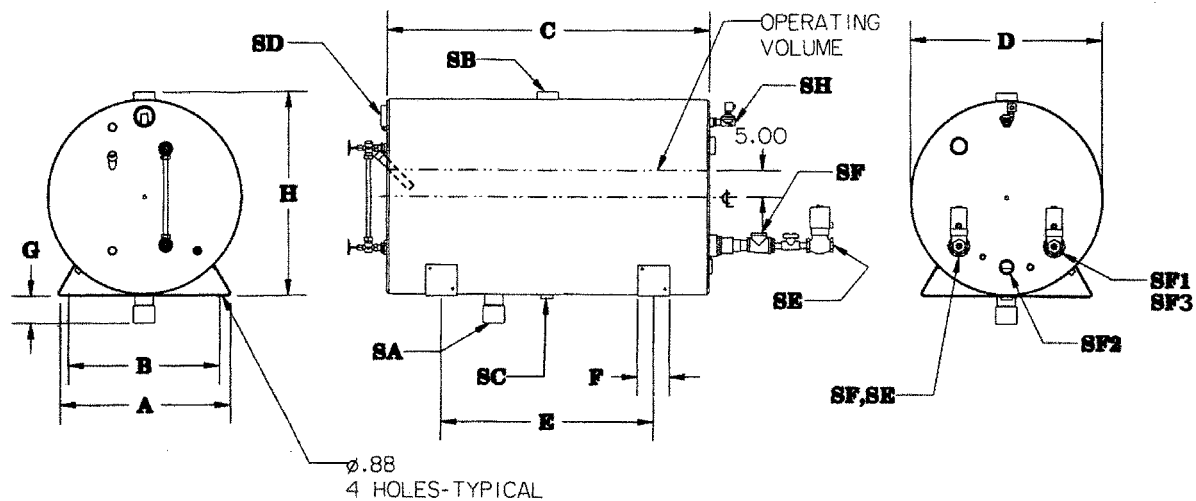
Equipment layout for E1004–1104 modulating steam generators
